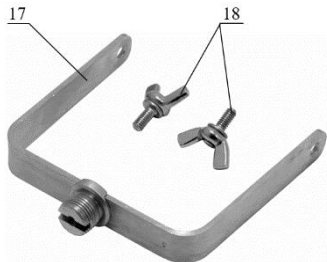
Holder and screws for mounting to the telescopic rod and radiometer
